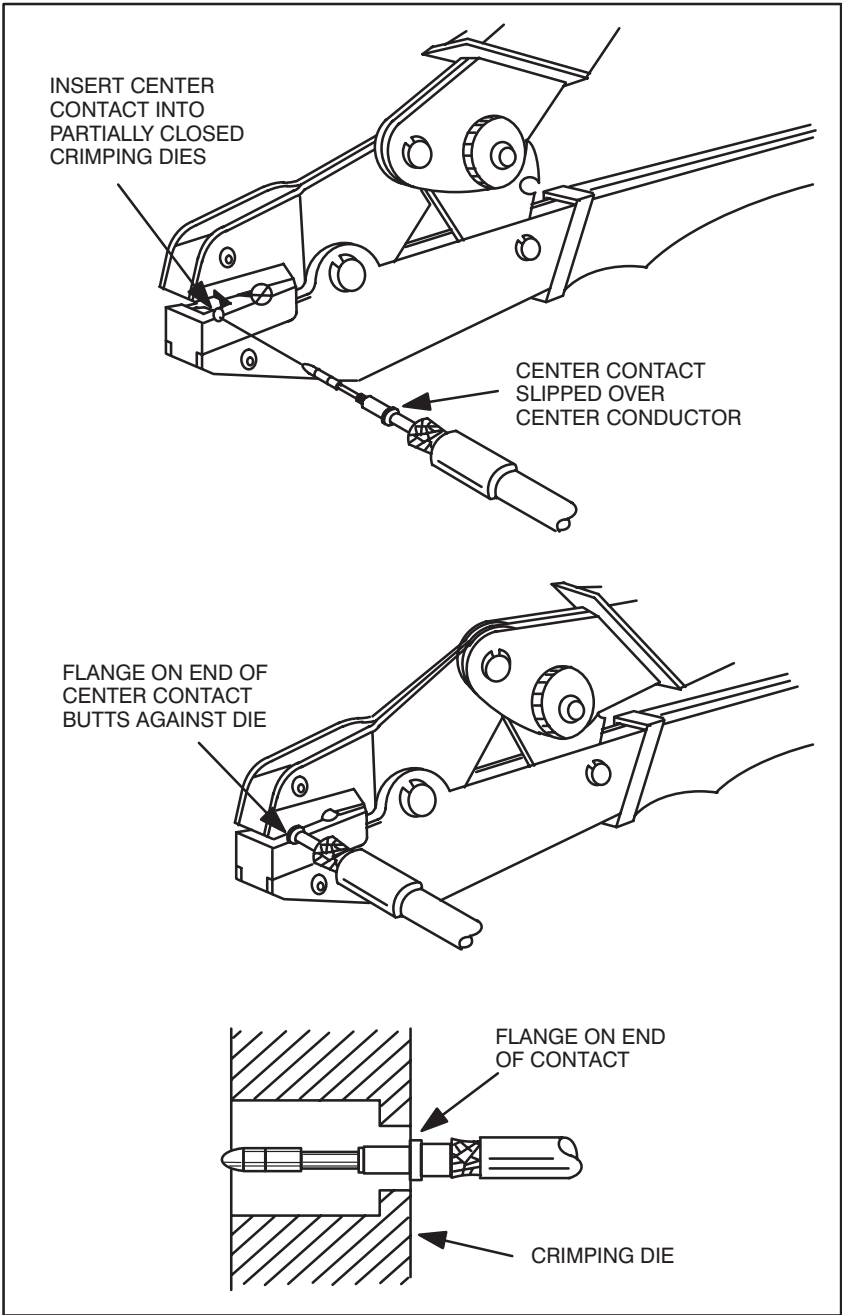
Connector Installation Step 3 for RG-59/U Cable
